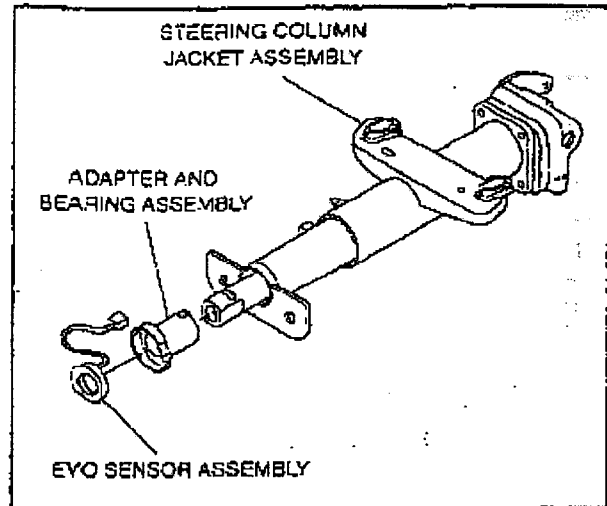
Removing Bearing Assembly and Sensor from Steering Column
